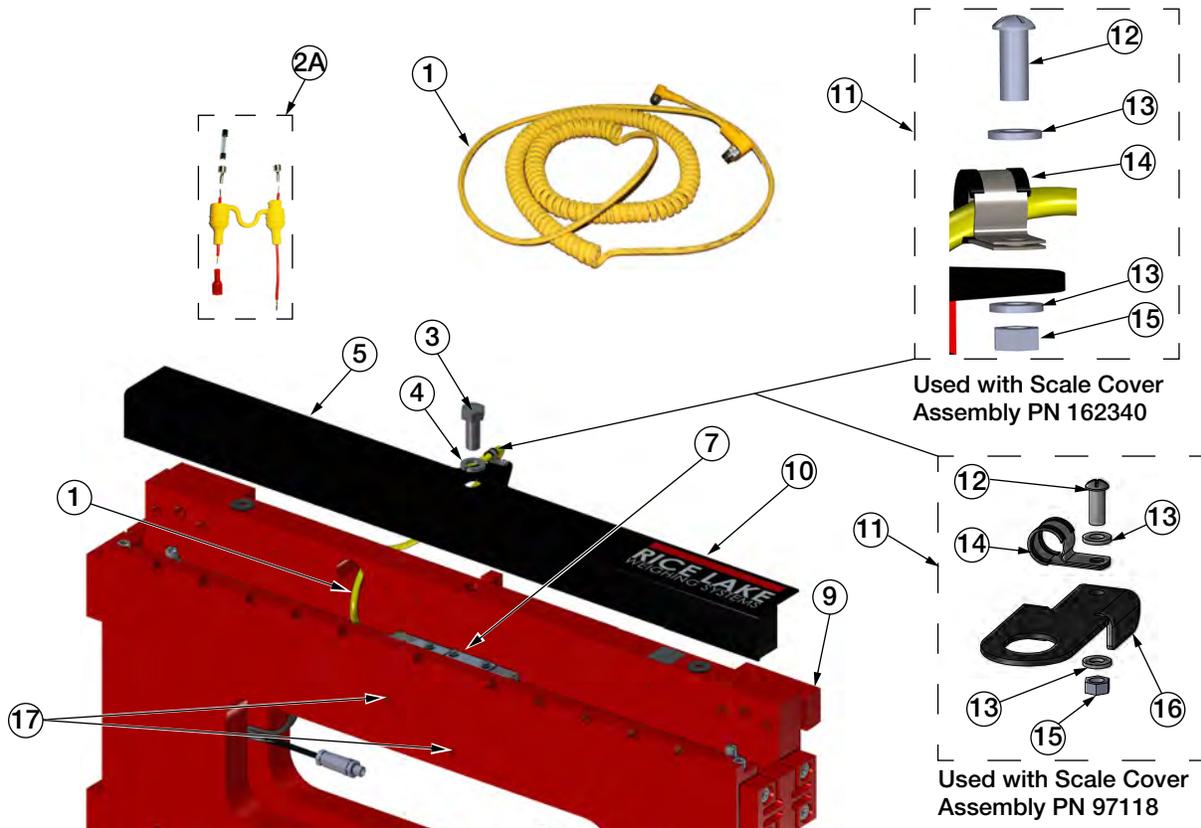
Cargo Lift Scale Assembly Parts Illustration
